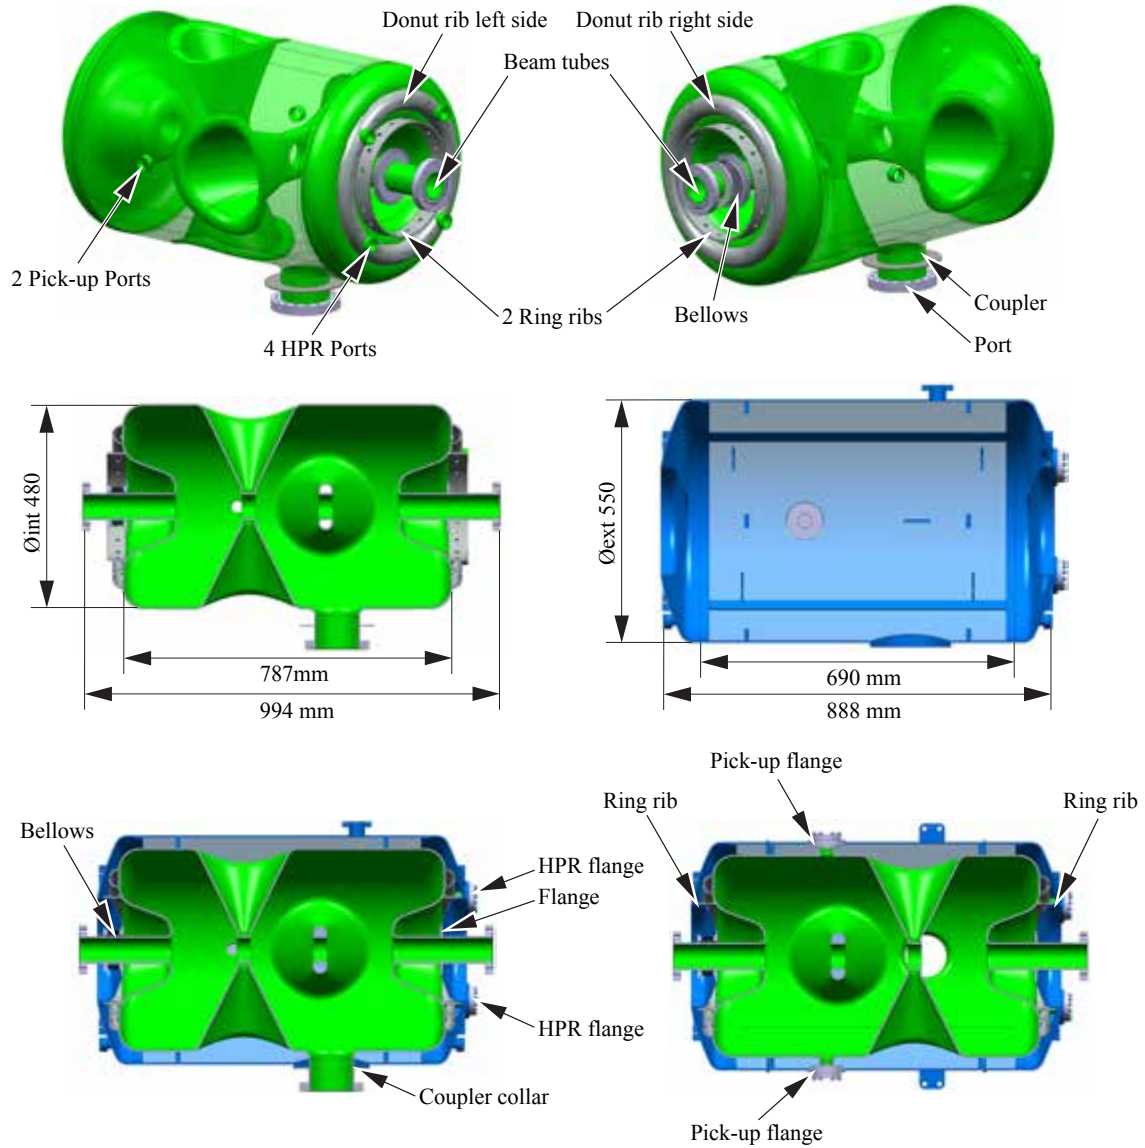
Mechanical design of the spoke cavity and helium tank. Top: Double spoke cavity. Bottom: Helium tank assembly.
